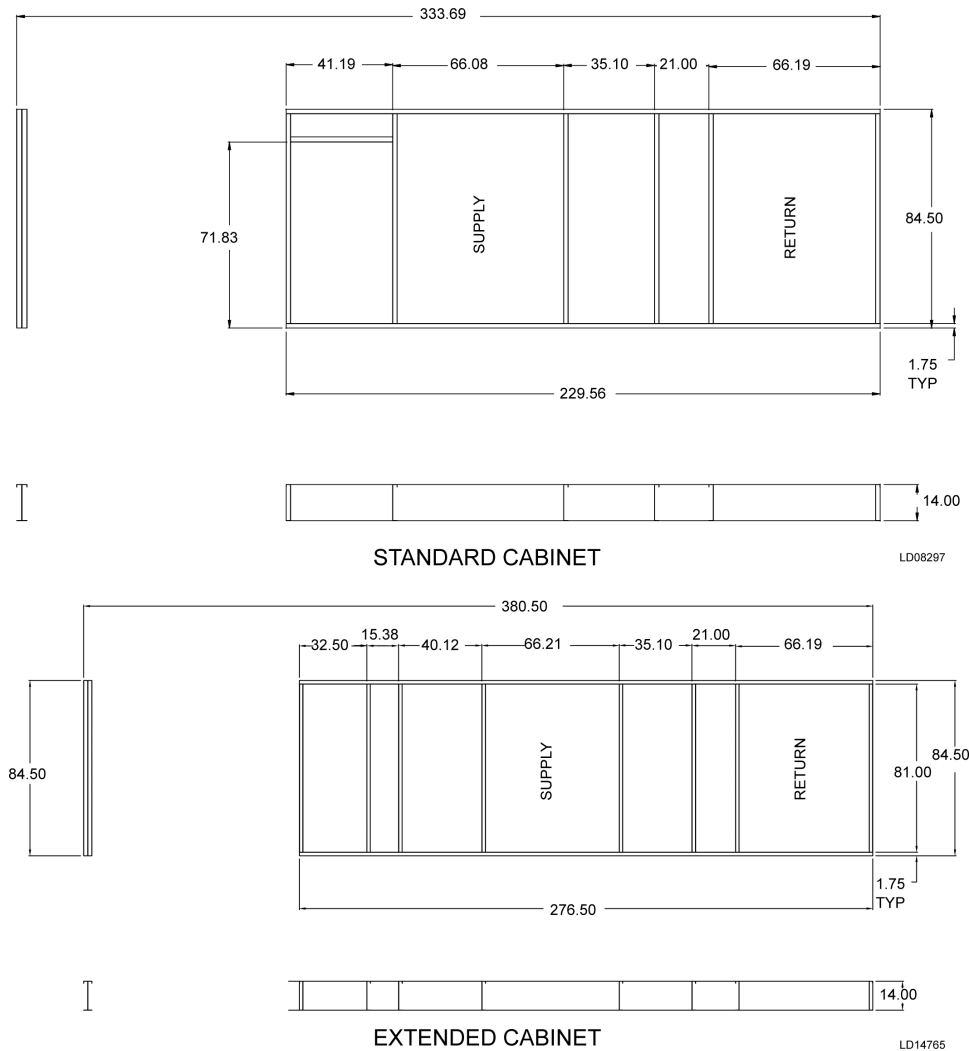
Location and dimension drawing, 050-061 models, side supply, rear return, extended cabinet
